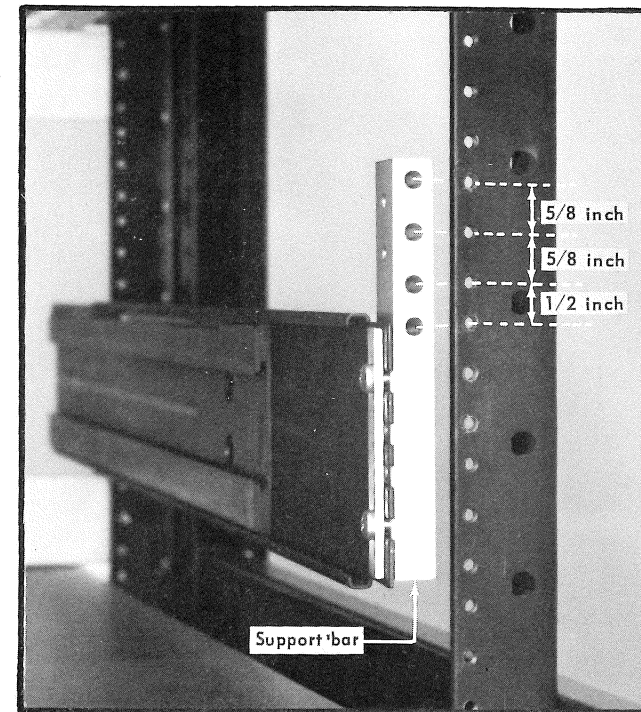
Vertical mounting position for rear end of slide-out tracks. Left stationary section is shown.
